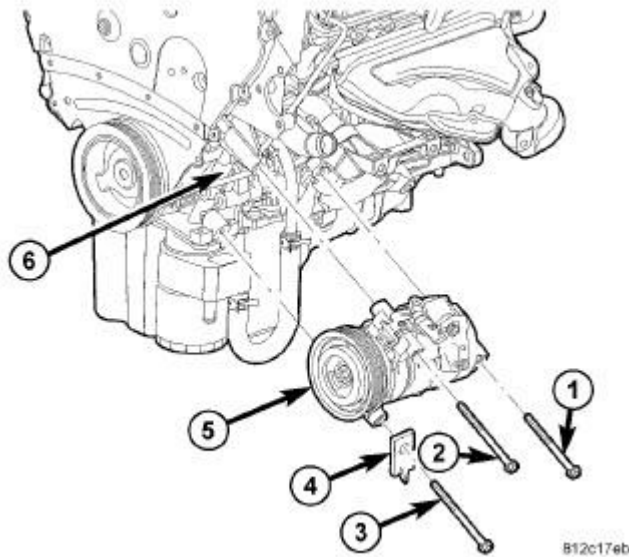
COMPRESSOR REMOVAL & INSTALLATION
